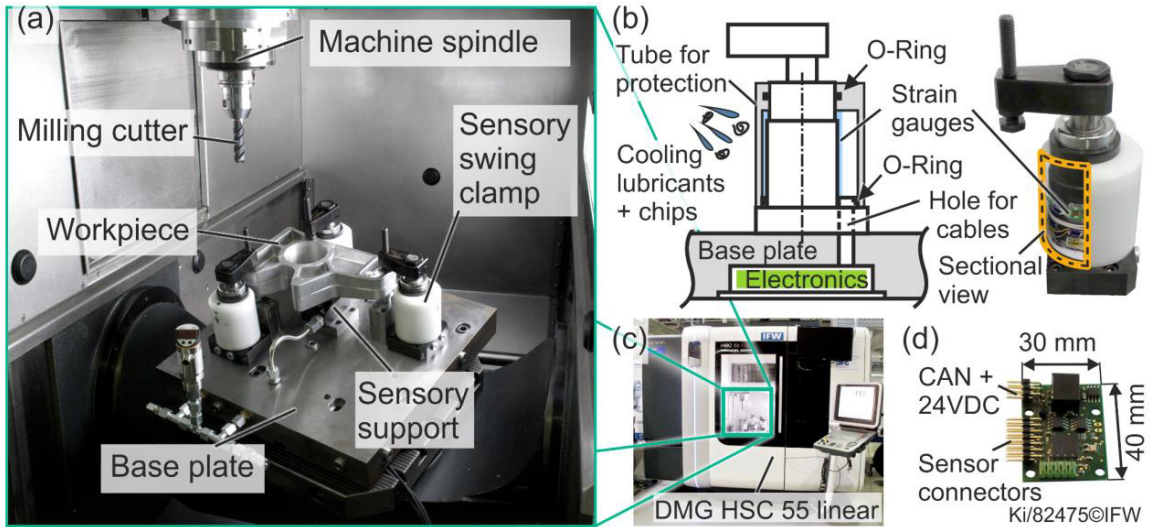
(a) Sensory clamping system inside a milling center; (b) Protection of the sensors and the electronic devices; (c) Milling center for the milling tests; (d) Integrated electronic device for signal-preprocessing
